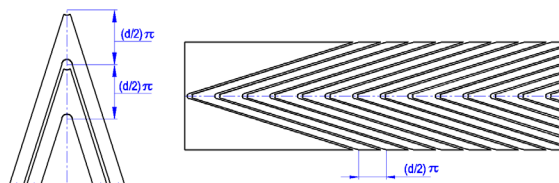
Laser cutting of a sheet metal for a special double thread spring
